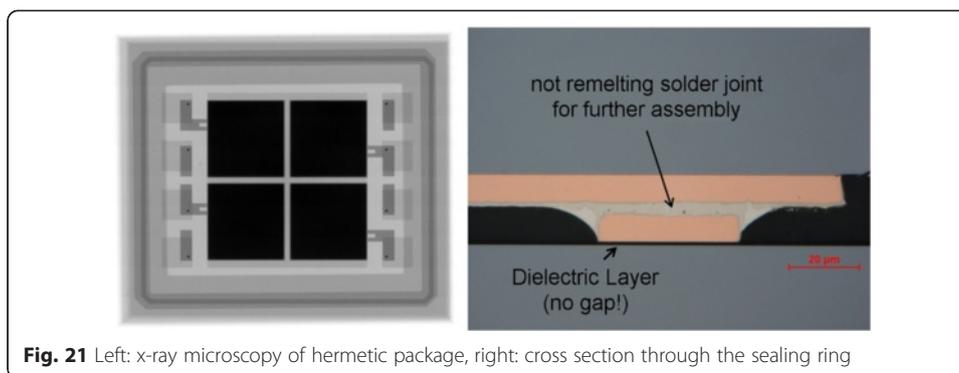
Left: x-ray microscopy of hermetic package, right: cross section through the sealing ring
